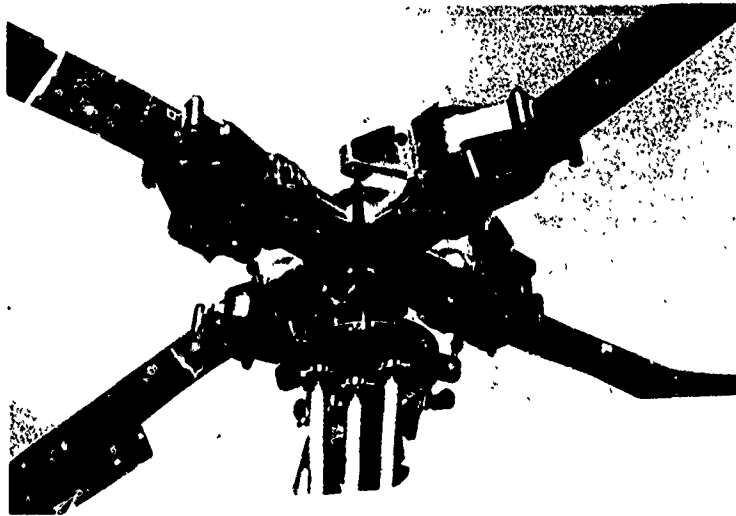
Rotorhub and Blade Attachment of the Bölkow Rigid Rotor System
